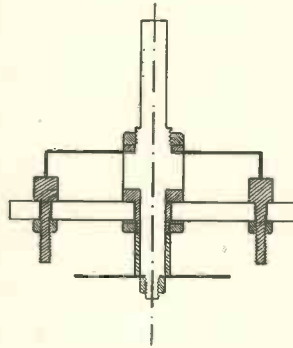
SECTIONAL DRAWING OF THE SWITCH. Showing the construction of the spindle and contact blade.
